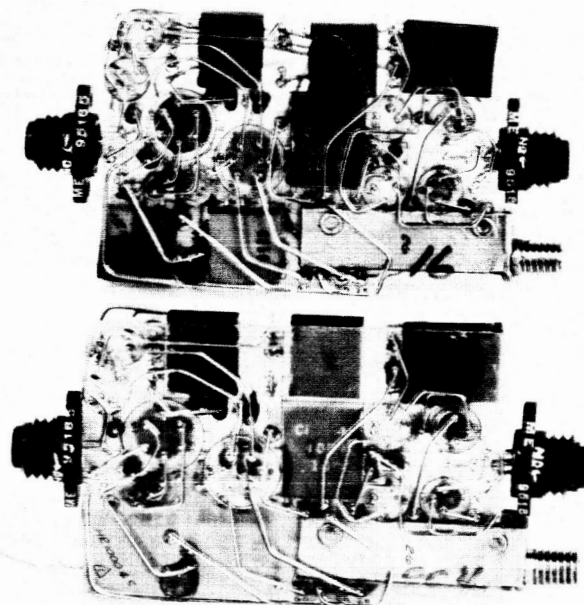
EEG WELDED ELECTRONIC ASSEMBLIES
